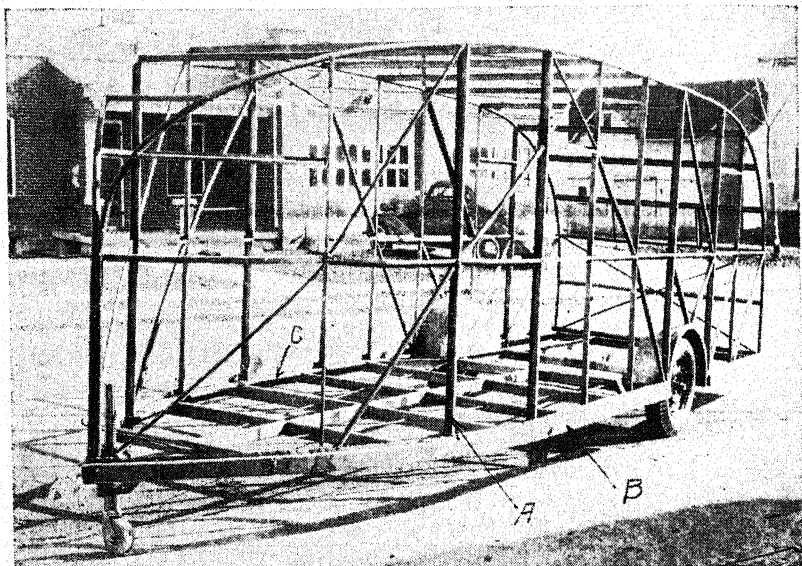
View of arc welded house trailer frame showing sill plate "B" of modified channel form.
